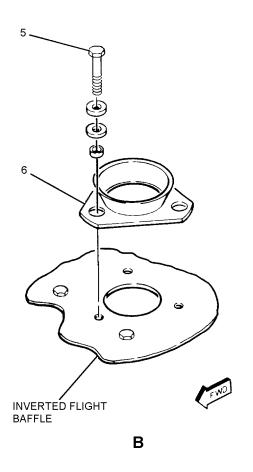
No. 3 Fuel Tank Level Sensor Tube Restrictor (5RAP668) (Sheet 2)
